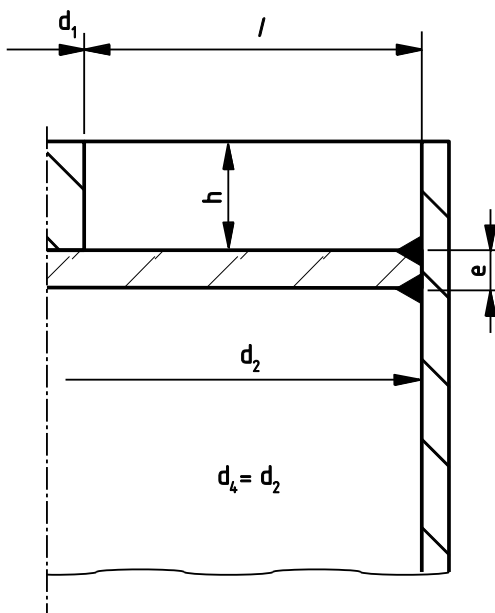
Welded end with ribs (Ribs welded to a protruding shell)
